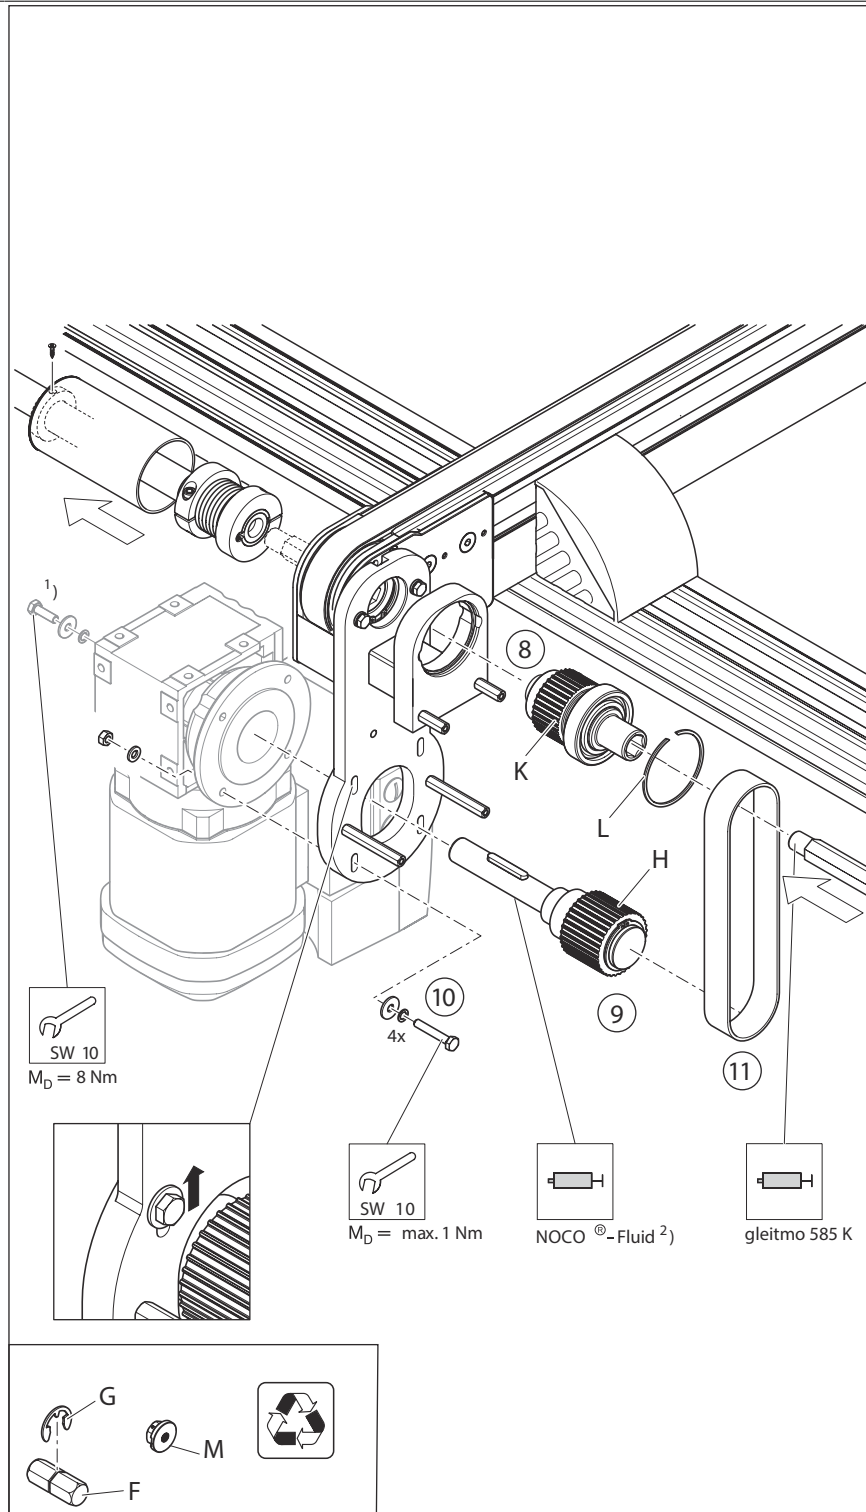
Assembly at belt section CSS/N, CSS/NT: MS = 3 (3/3)
